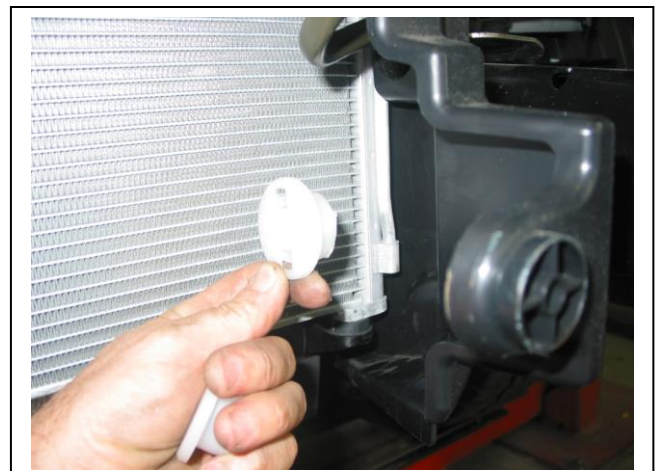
White plastic plug between radiator and chassis rail. Removed for photo.
